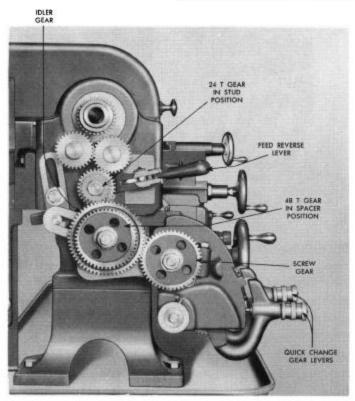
CHANGE GEAR TRAIN ON LOGAN QUICK CHANGE GEAR LATHE
